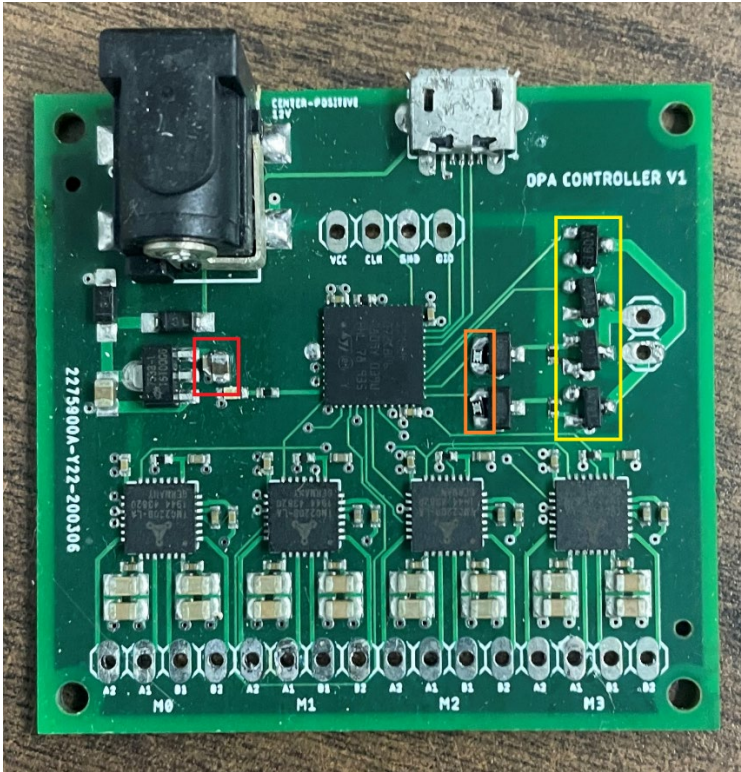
Control board designed for the 4 motion stages and shutter of the OPA. The PCB was fabricated and assembled by JLCPCB. The board contains 4 Trinamic TMC2209 stepper motor driver ICs and an H-bridge to drive the geared motor of the shutter. An STM32F0 series microcontroller provides a single USB interface to control all of the motors inside the OPA. A 10 μ F capacitor (in red box) was added by hand to prevent the microcontroller from resetting due to the power surge caused by plugging in the 12V motor power supply. Pull-down resistors (in orange box) were hand-soldered to prevent a shoot-through condition which destroyed the MOSFETs of the H-bridge (replacement MOSFETs are in yellow box). The components were soldered with a soldering iron heated to 700 °C. They were held down with a flat-head screwdriver. The solder used was 63% Sn and 37% Pb with rosin flux core. The flux residue was cleaned with isopropanol and a toothbrush.
